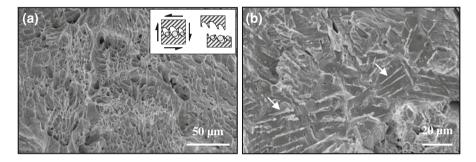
SE detector images of the fracture surfaces of impact test specimens made of the SAC 405 solder. a Specimen tested at room temperature. The fracture surface is characterised by the presence of many 'dimples'. The idealised drawing in the inset shows two stages in the dimple-formation process; the dimples form around the hard, brittle IMCs in the soft, ductile Sn matrix and are slightly elongated since the material is sheared during the CVN impact test. b Specimen tested at -75° C. The flat grey areas are Sn, while the bright particles indicated by *arrows* are IMCs. Data from imec
